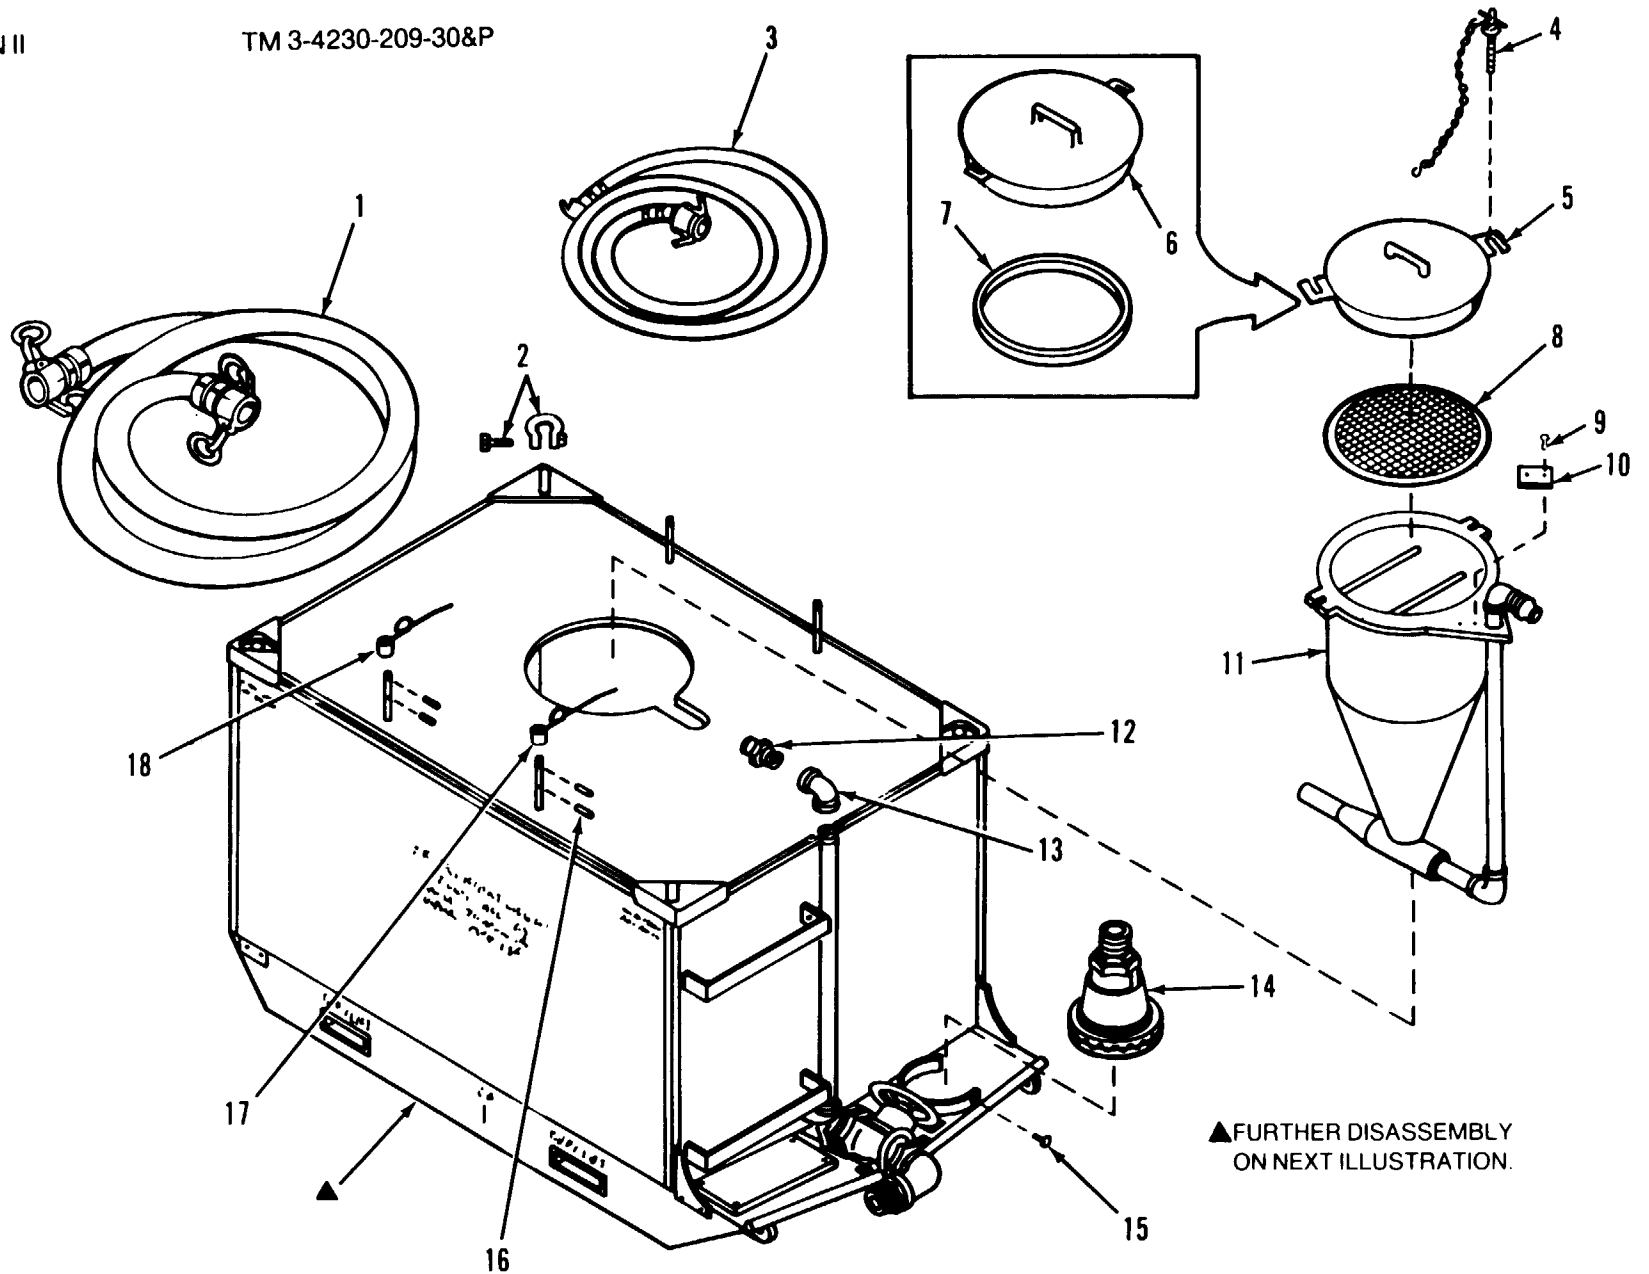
Skid Mounted Decontaminating Apparatus Tank Unit and Hopper Access Cover (1 of 2).
